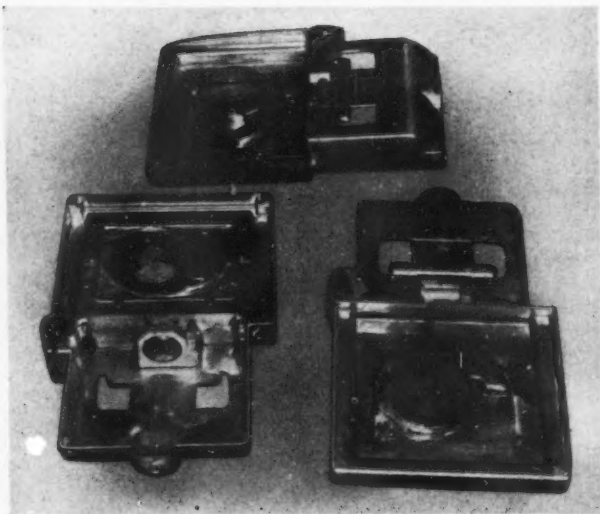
Three Examples of Photographic Enlarger Base Castings Produced on the Triulzi 1,000-ton Machine
